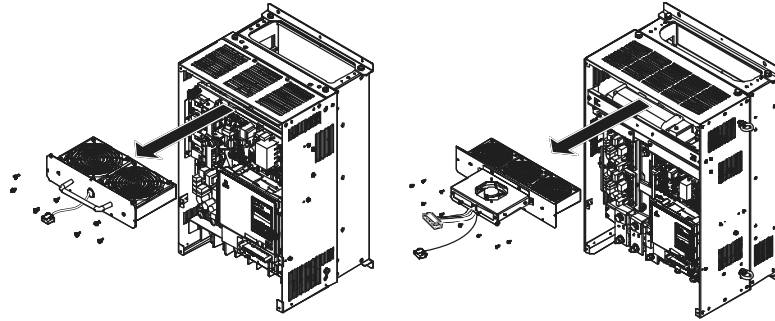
Removing the Fan Unit: 2A0169 to 2A0415, 4A0139 to 4A0362
